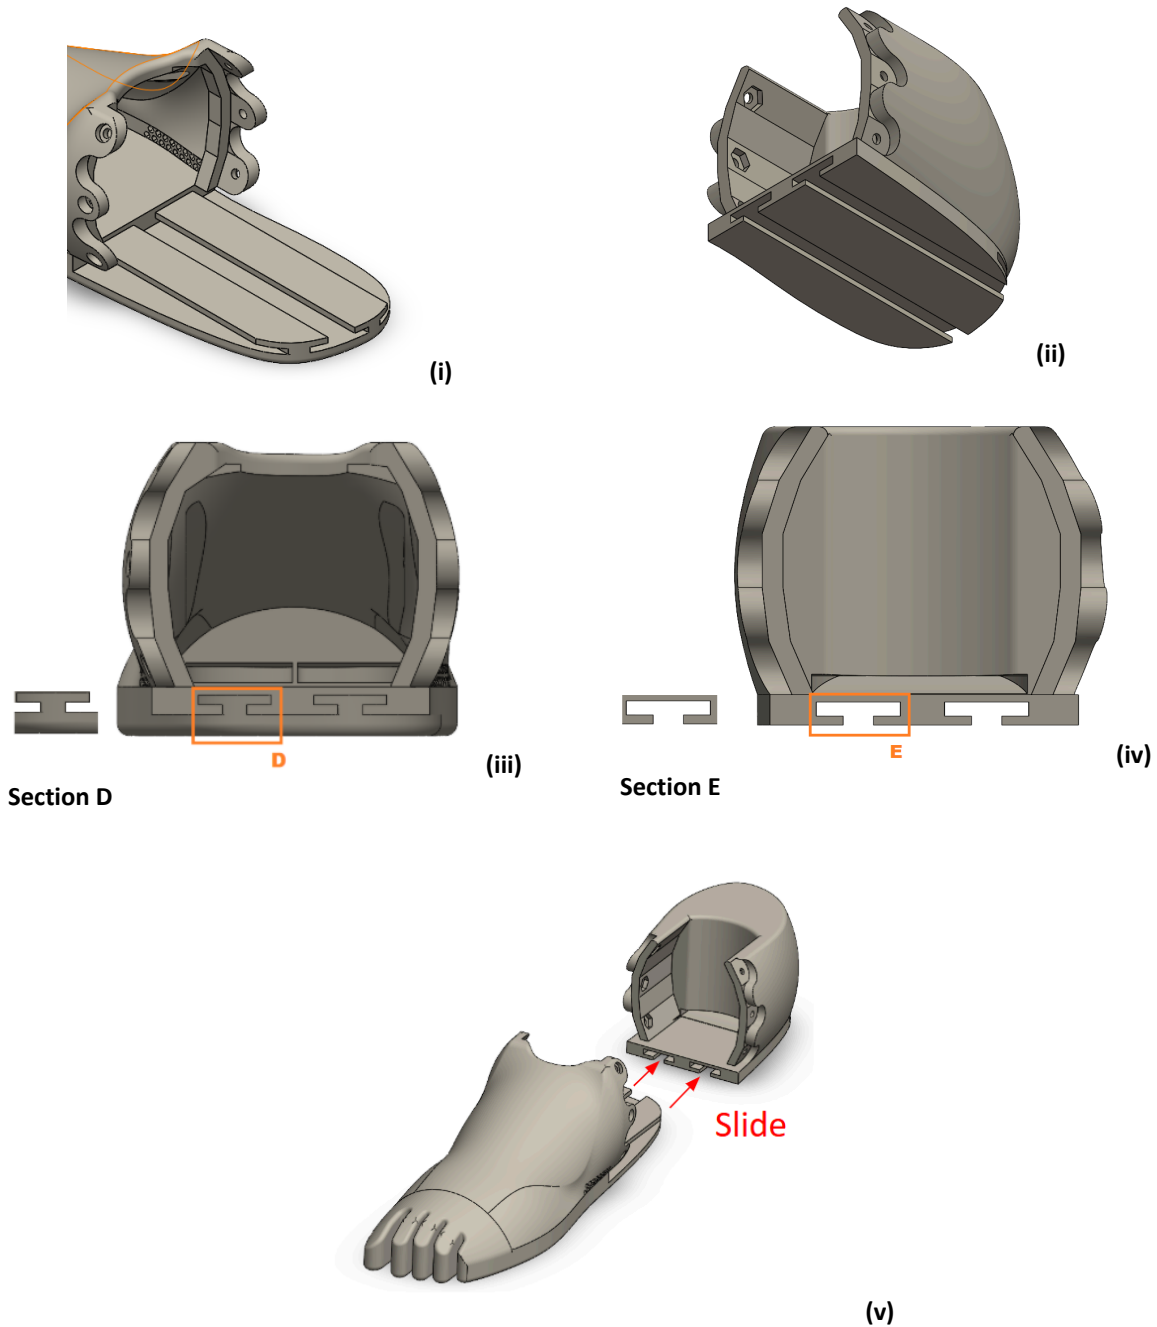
Isometric view of forefoot rails (i), isometric view of heel rails (ii), Section view of forefoot rail profile (iii), section view of heel rail profile (iv), image showing how forefoot and heel slide together (v).
